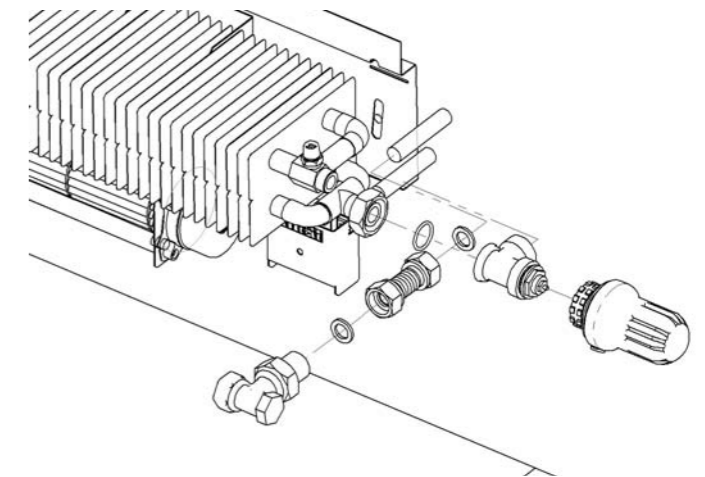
Connect fittings. Inlet - thermostatic valve. Outlet - screw fitting. The inlet is always at the bottom. Test the connection tightness.
